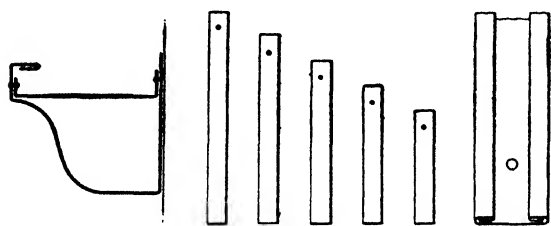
Section of Eaves Trough and Conductor Gauges
